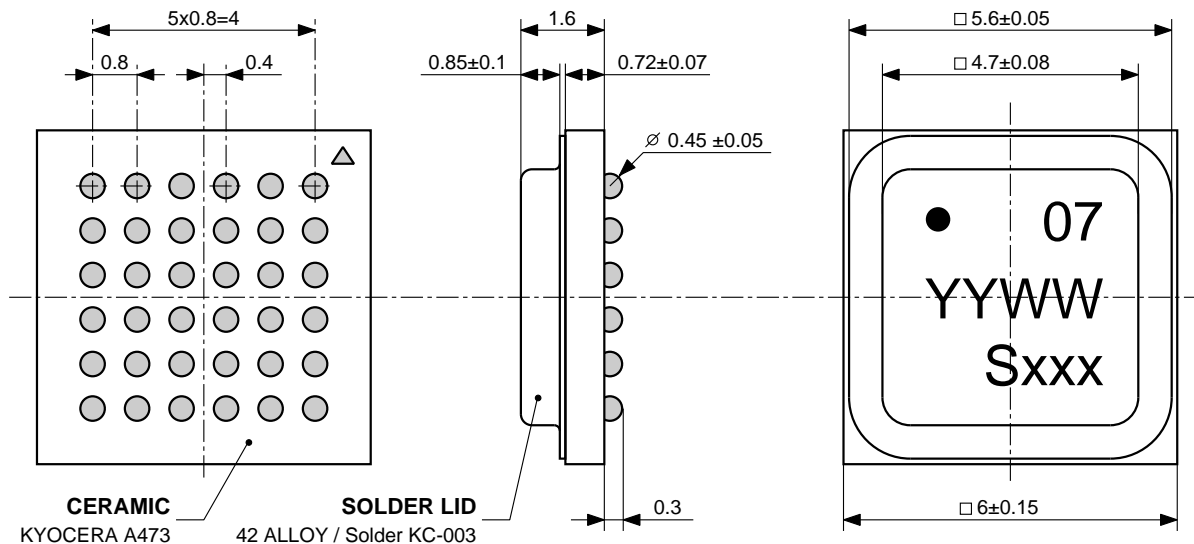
SY1007S mechanical drawing (CBGA 36 balls).
